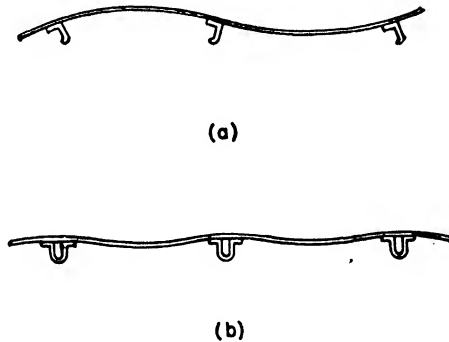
Panels with Open-Section and Closed-Section Stringers.
